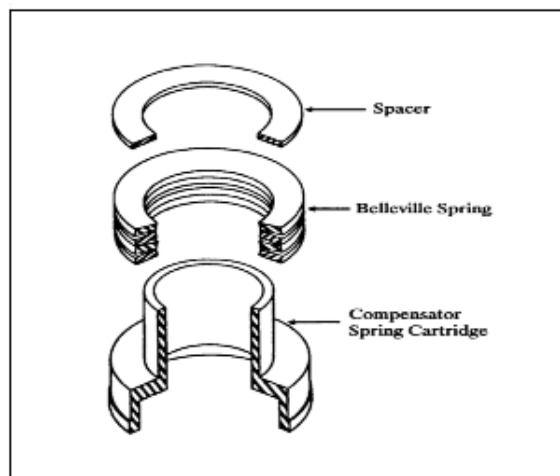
SB Belleville Spring Assembly with Spring Cartridge
